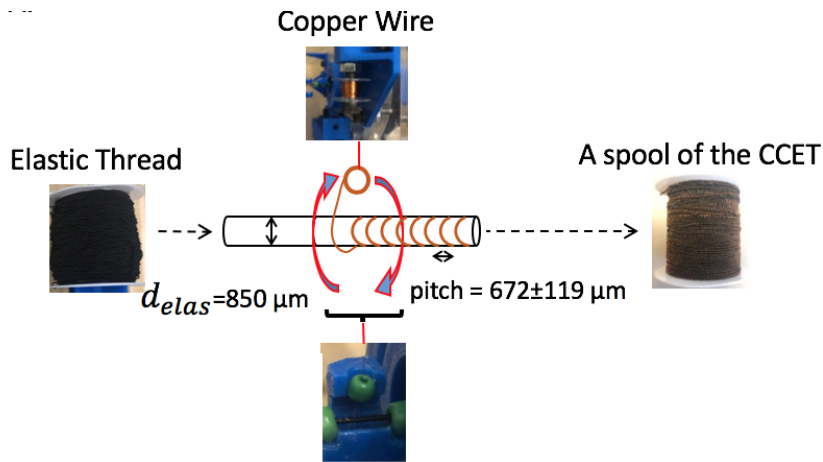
Illustration of fabrication process of copper coiled elastic thread.
